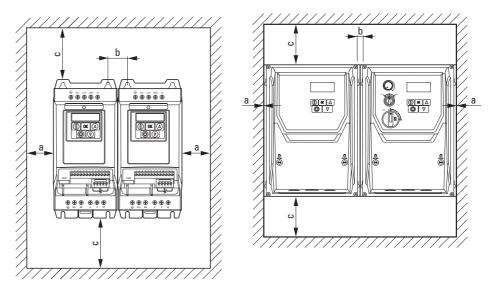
Clearances forair cooling (left: IP20; right: IP66)
